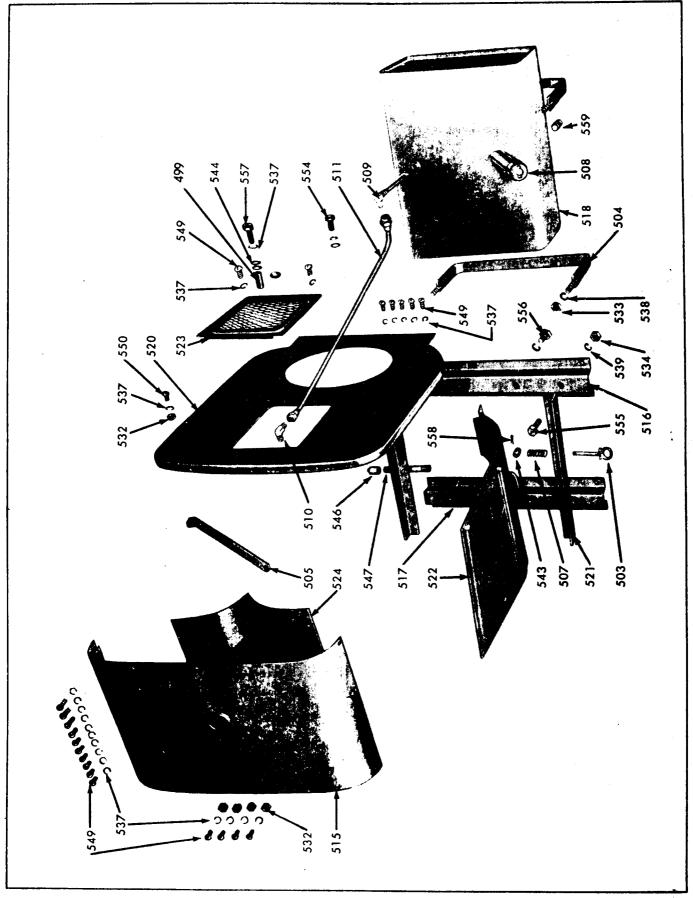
, ENGINE HOUSE WITH UNDERSLUNG FUEL TANK
